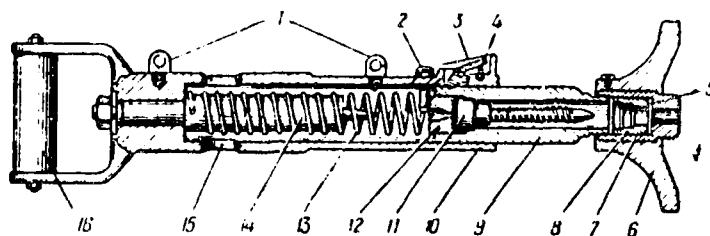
Underwater Hole-Punching Gun (UHPG): 1 - lugs; 2 - safety unit; 3 - catch; 4 - spring; 5 - lining; 6 - tripod; 7 - muzzle attachment; 8 - spacer bushing; 9 - barrel; 10 - frame; 11 - cartridge containing charge and steel pin or punch; 12 - breech; 13 - firing pin spring; 14 - firing pin; 15 - hole; and 16 - handle.
